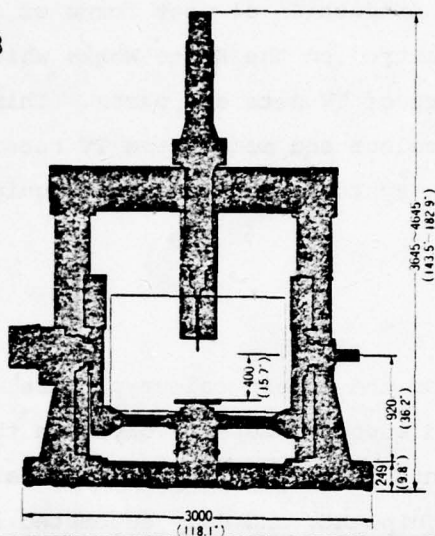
SHIN MEIWA ROBOT WELDER PW 150 SERIES
